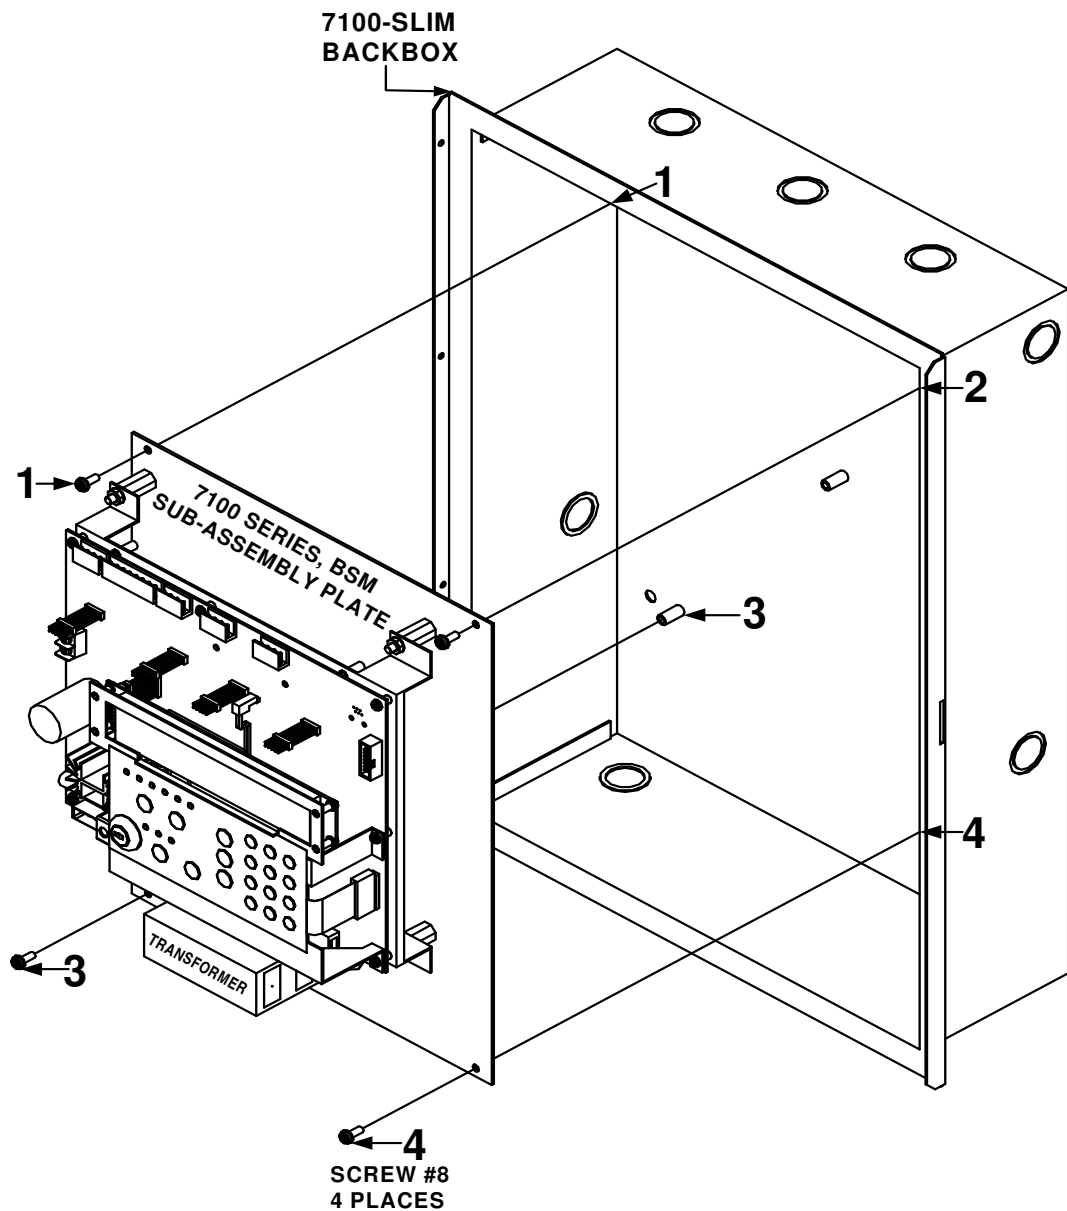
7100-Slim, BSM Sub-Assembly Plate (Exploded View)
